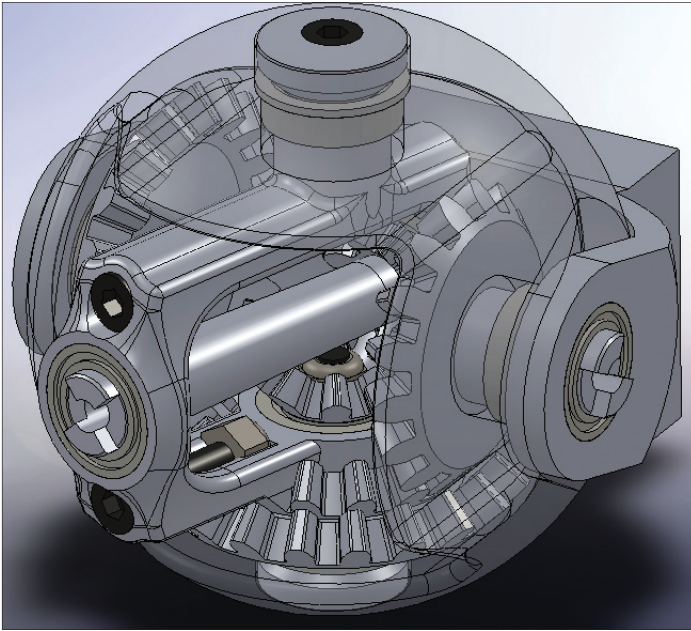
The newer head mechanism with properly designed bevel gears to enable 3DOF for a camera mounted at the front output shaft.
